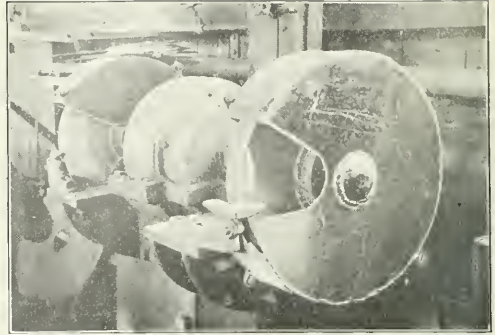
GUARD CONSTRUCTED FOR GRINDER
